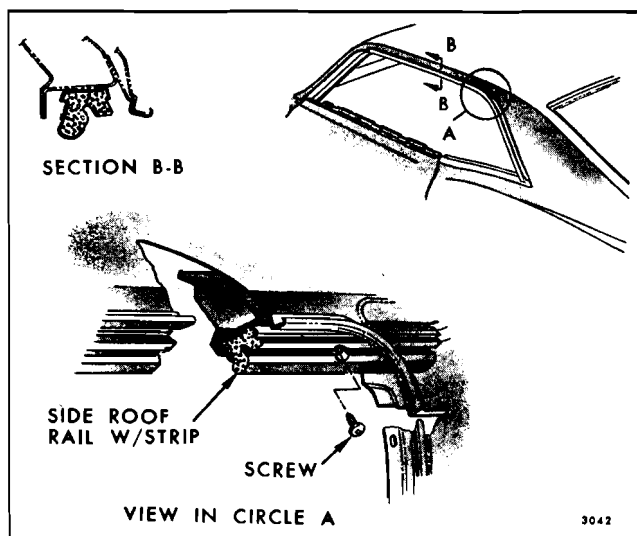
Side Roof Rail Weatherstrip - "47-57" Styles
